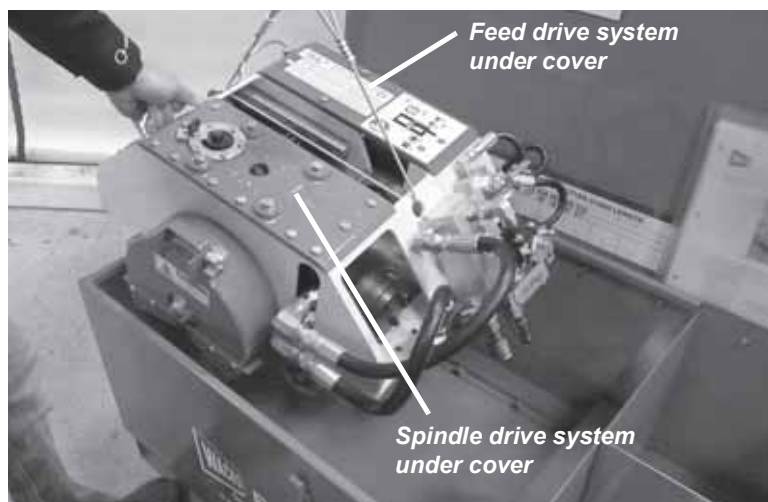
The drive systems are enclosed in the Trav-L-Cutter carriage.
